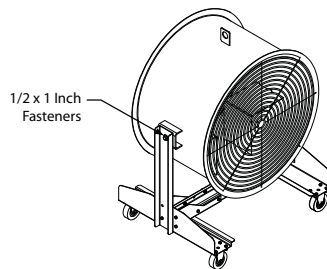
Roll-About Floor Stand Shown With Industrial Air Cannon
